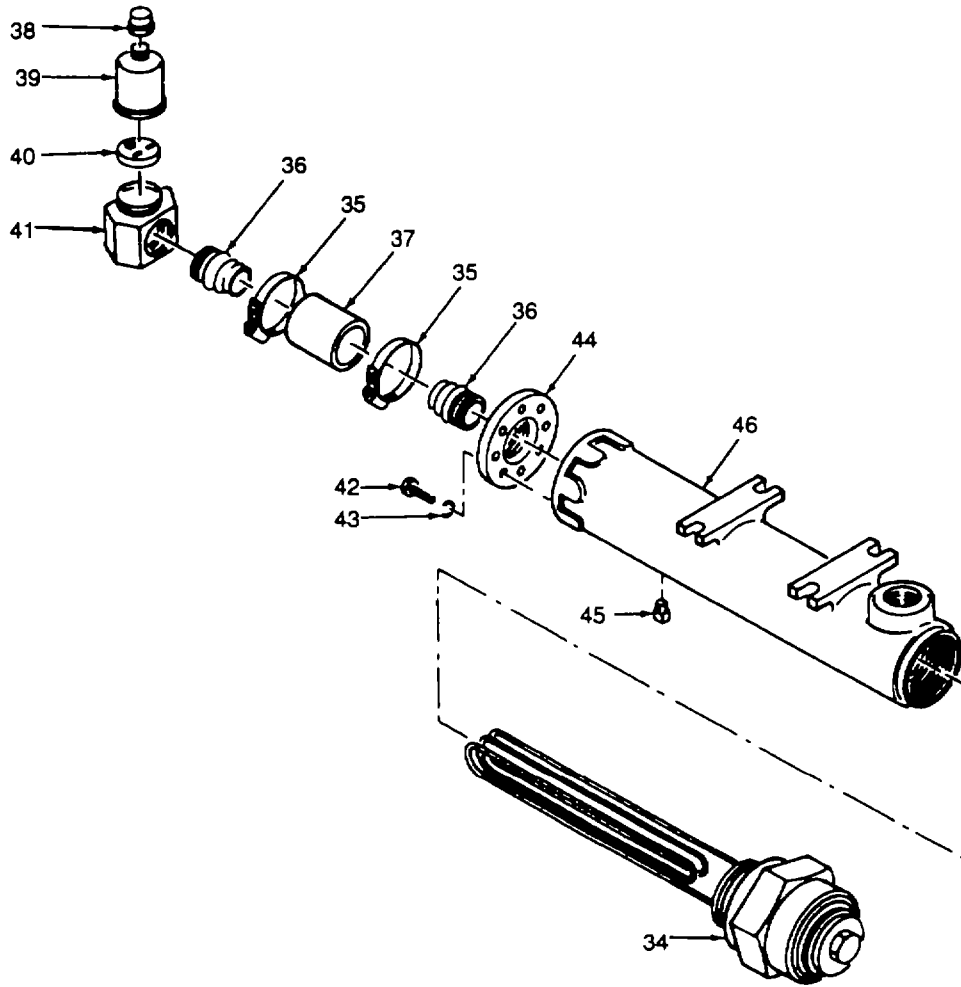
Engine Preheat Assembly (Sheet 1 of 3)
